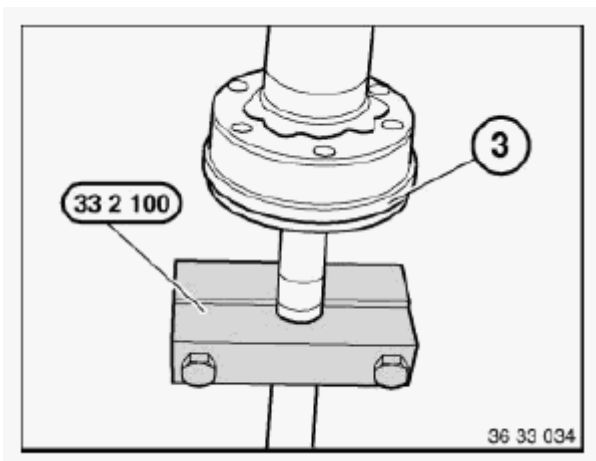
Gaiter Onto Cap With Special Tool (33 2 100)
